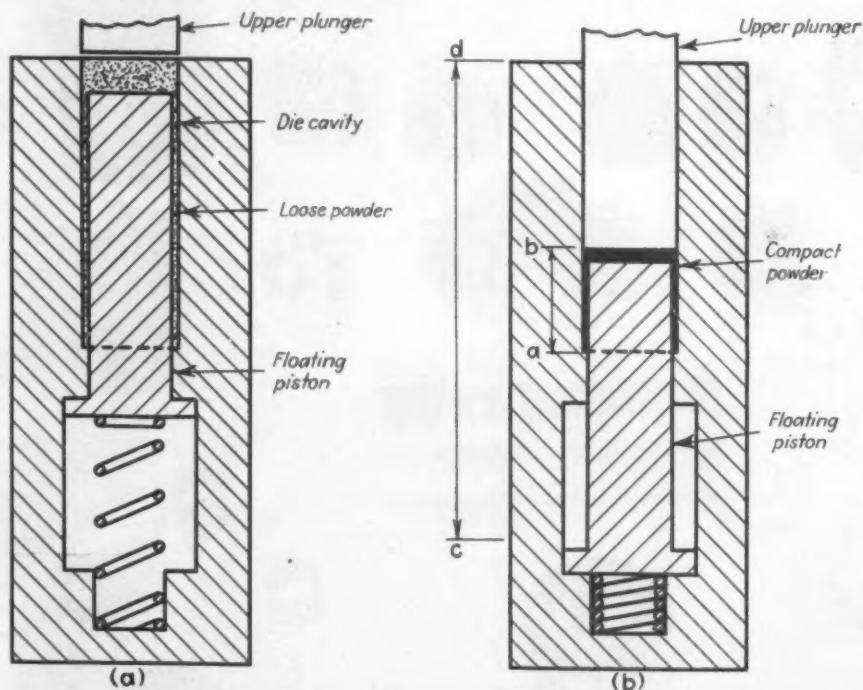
The operation of a forming die for making a powdered metal compact is shown here. (a) The die cavity is filled with powder around the floating piston before pressing is started, and (b) after compression, the powdered metal is pressed into the desired shape, the floating piston being forced to the bottom of the die cylinder. When the plunger pressure is released, the compact will be forced to the top of the die cavity.
